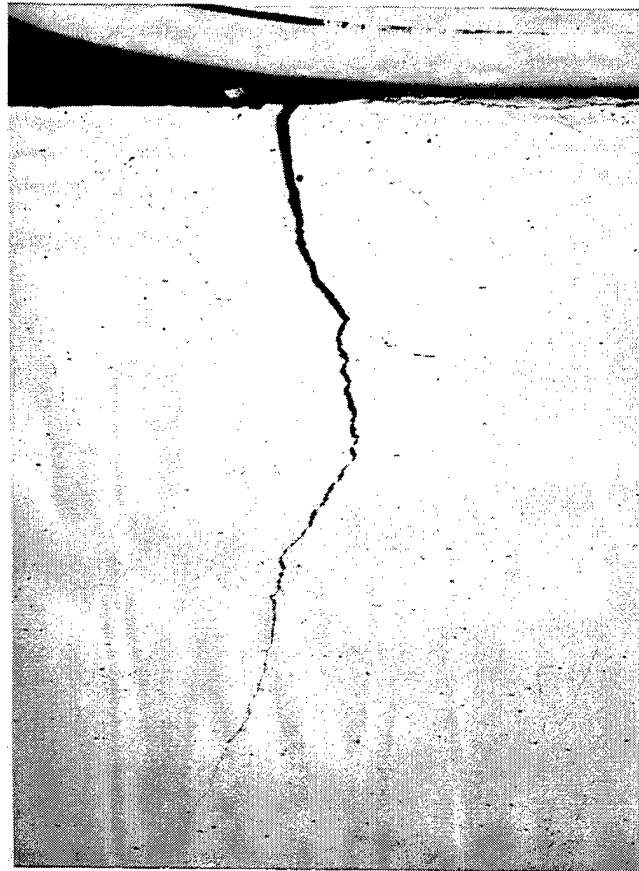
As-polished specimen with the crack seen in the small angle piece in Figure 24. The crack extended from the top surface halfway down the land edge of the countersunk rivet hole. Magnification: 40x.
